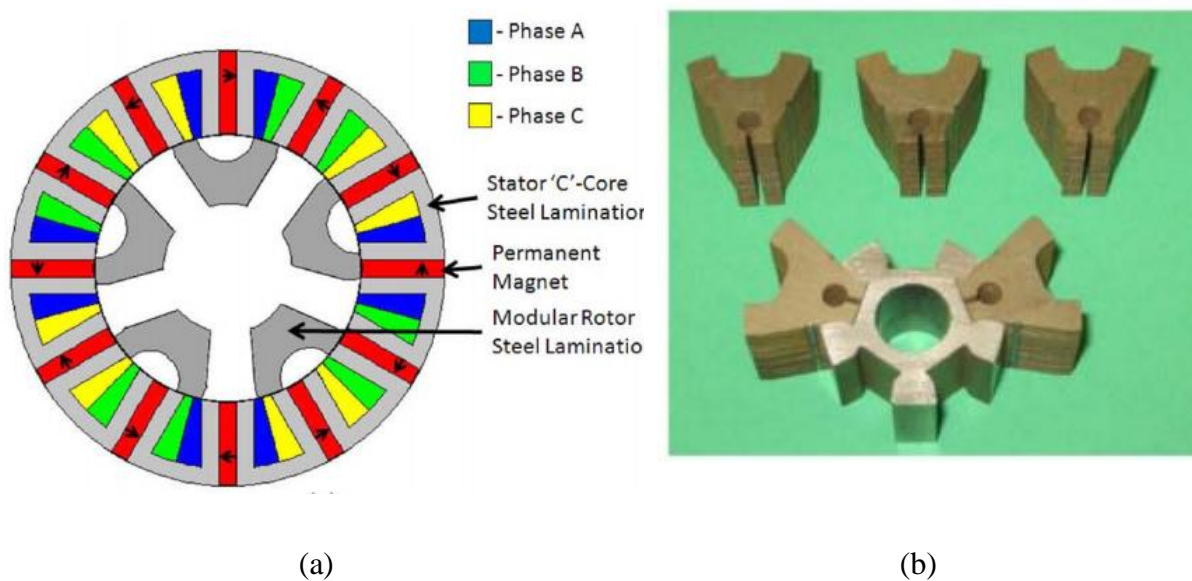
12-slot/10-pole FSPM machines. (a) Cross-sections. (b) Rotor prototypes [41].
